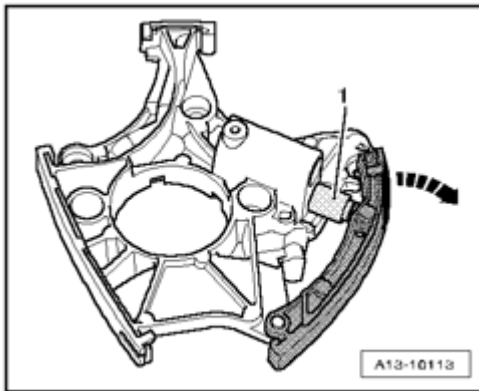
Fully Relieving Tension Of Guide Rail For Left/Right Camshaft Timing Chain Tensioner
